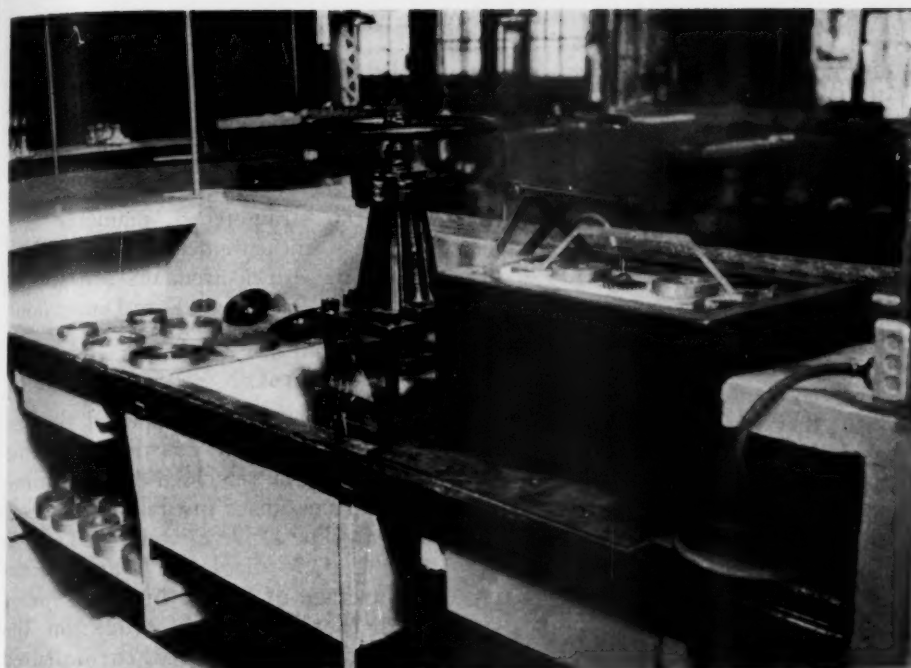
Remolding Equipment, Showing Die, Press and Heating Vat
